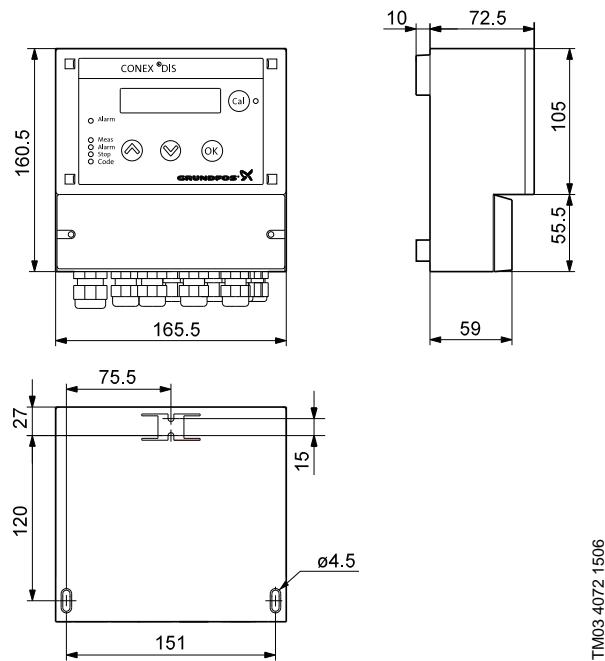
Dimensions, Conex® DIS-PR and Conex® DIS-D controllers
